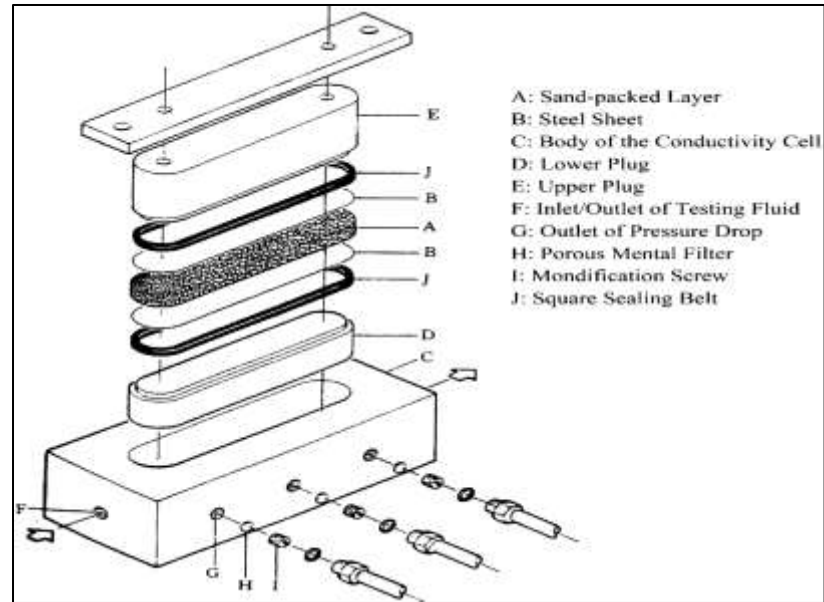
Exploded view of API fracture conductivity test unit (API RP 19D, 2008)
